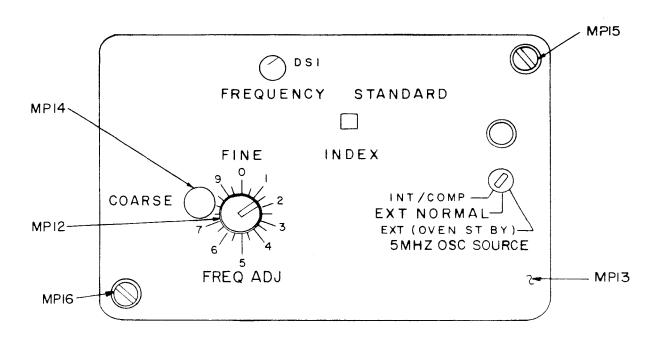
Frequency Standard Assembly A2A5, Component Locations
